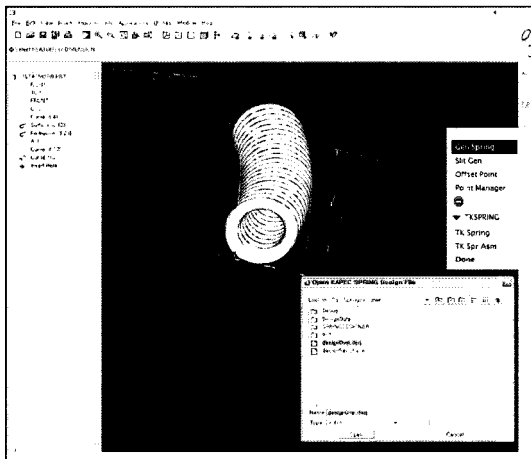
Damper spring modeling module (Assembly Spring) built in Pro/engineer 2001.
